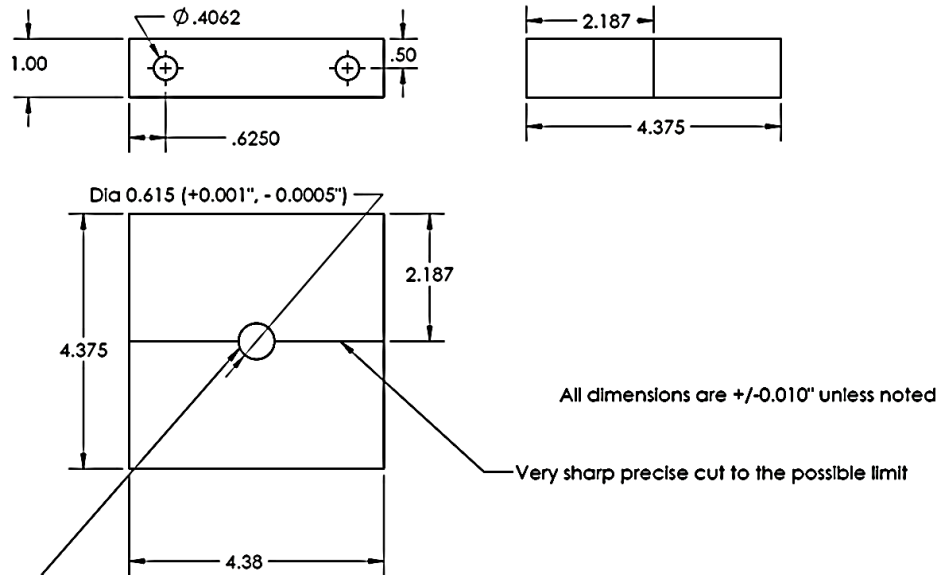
Model dimension (in inches) of Pile 2 head mass.
